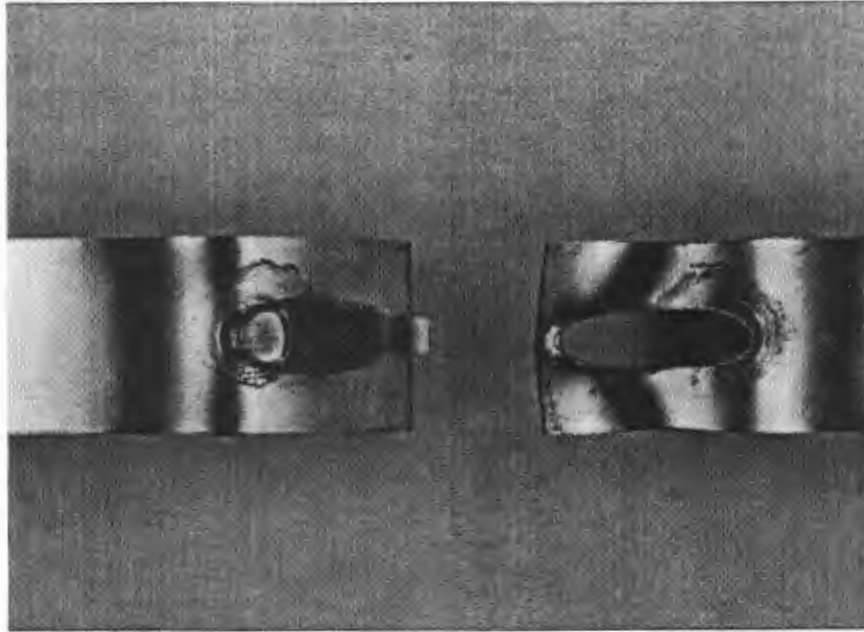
Typical failure of a spot weld peel specimen welded under improved conditions. Failure occurred by metal tearing initiated within the heat-affected zone; magnified 1 $\times$ .
